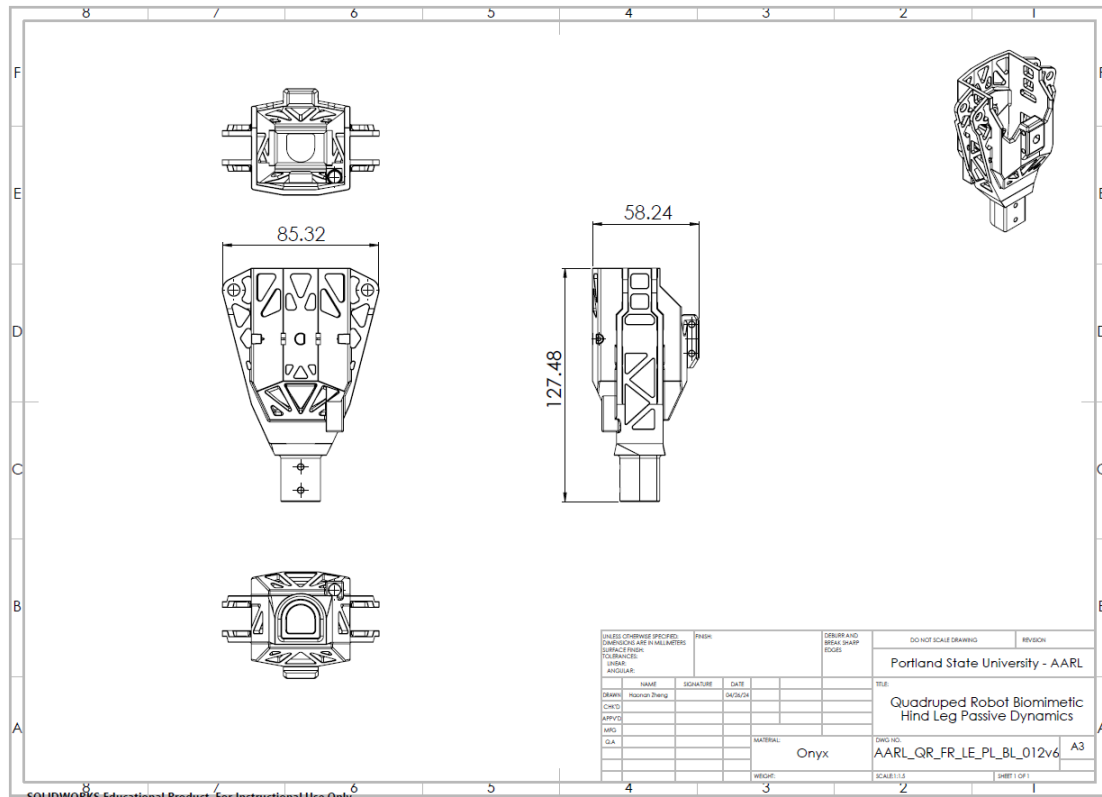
CAD drawing of revised link 1 enlarged to house the new hand wound torsion hip spring
